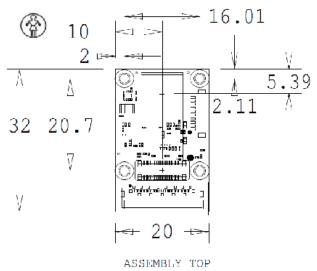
e-CAM136\_MI1335\_ADP Board Mechanical Dimensions (Top View)
